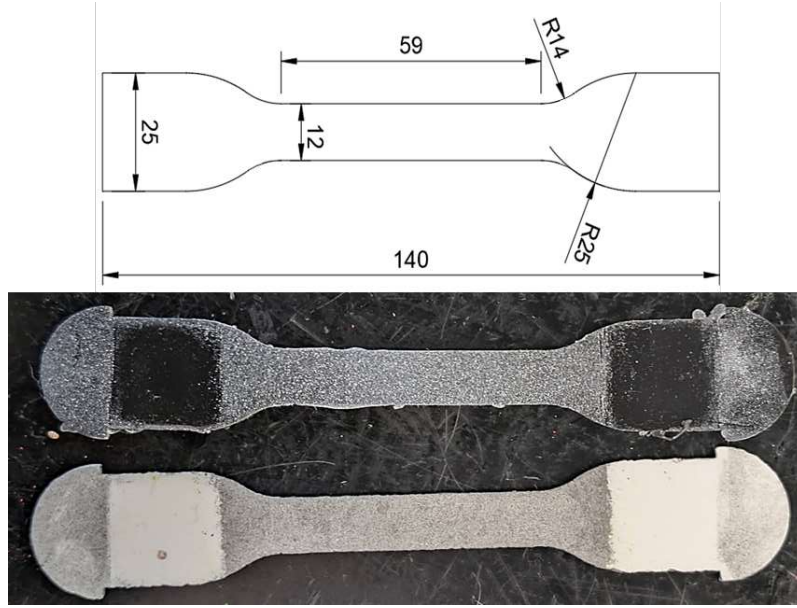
Dragon Skin 10 specimen dimensions (in mm) used in this study.
